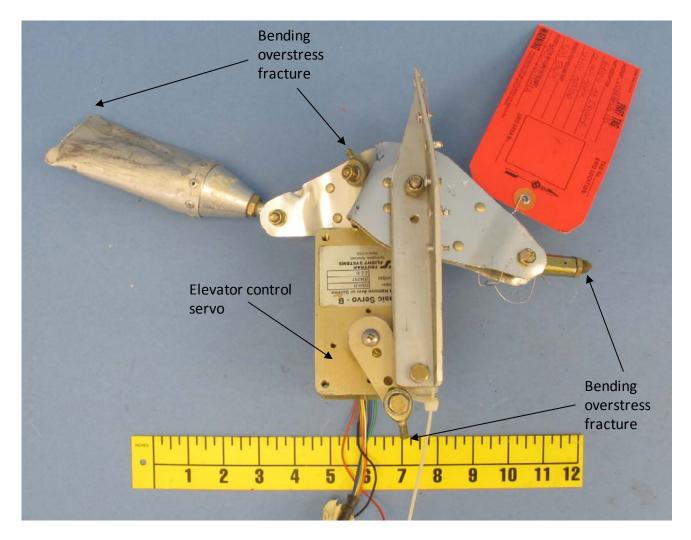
Portion of elevator control servo assembly showing each linkage fracture.
